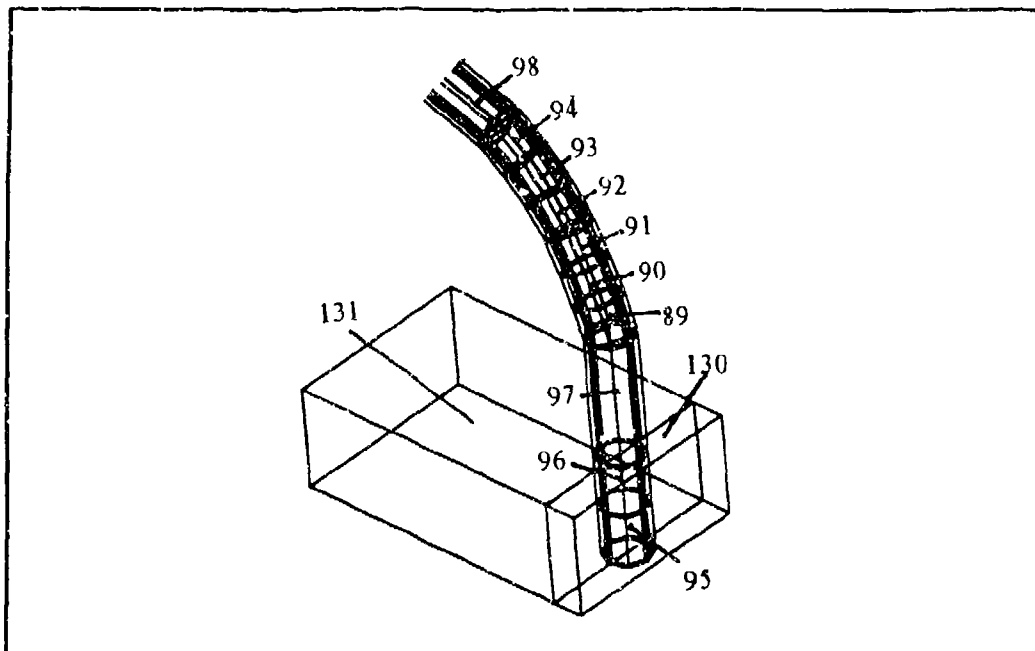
Nose Wheel Fork and Nose Wheel Attachment Tube
